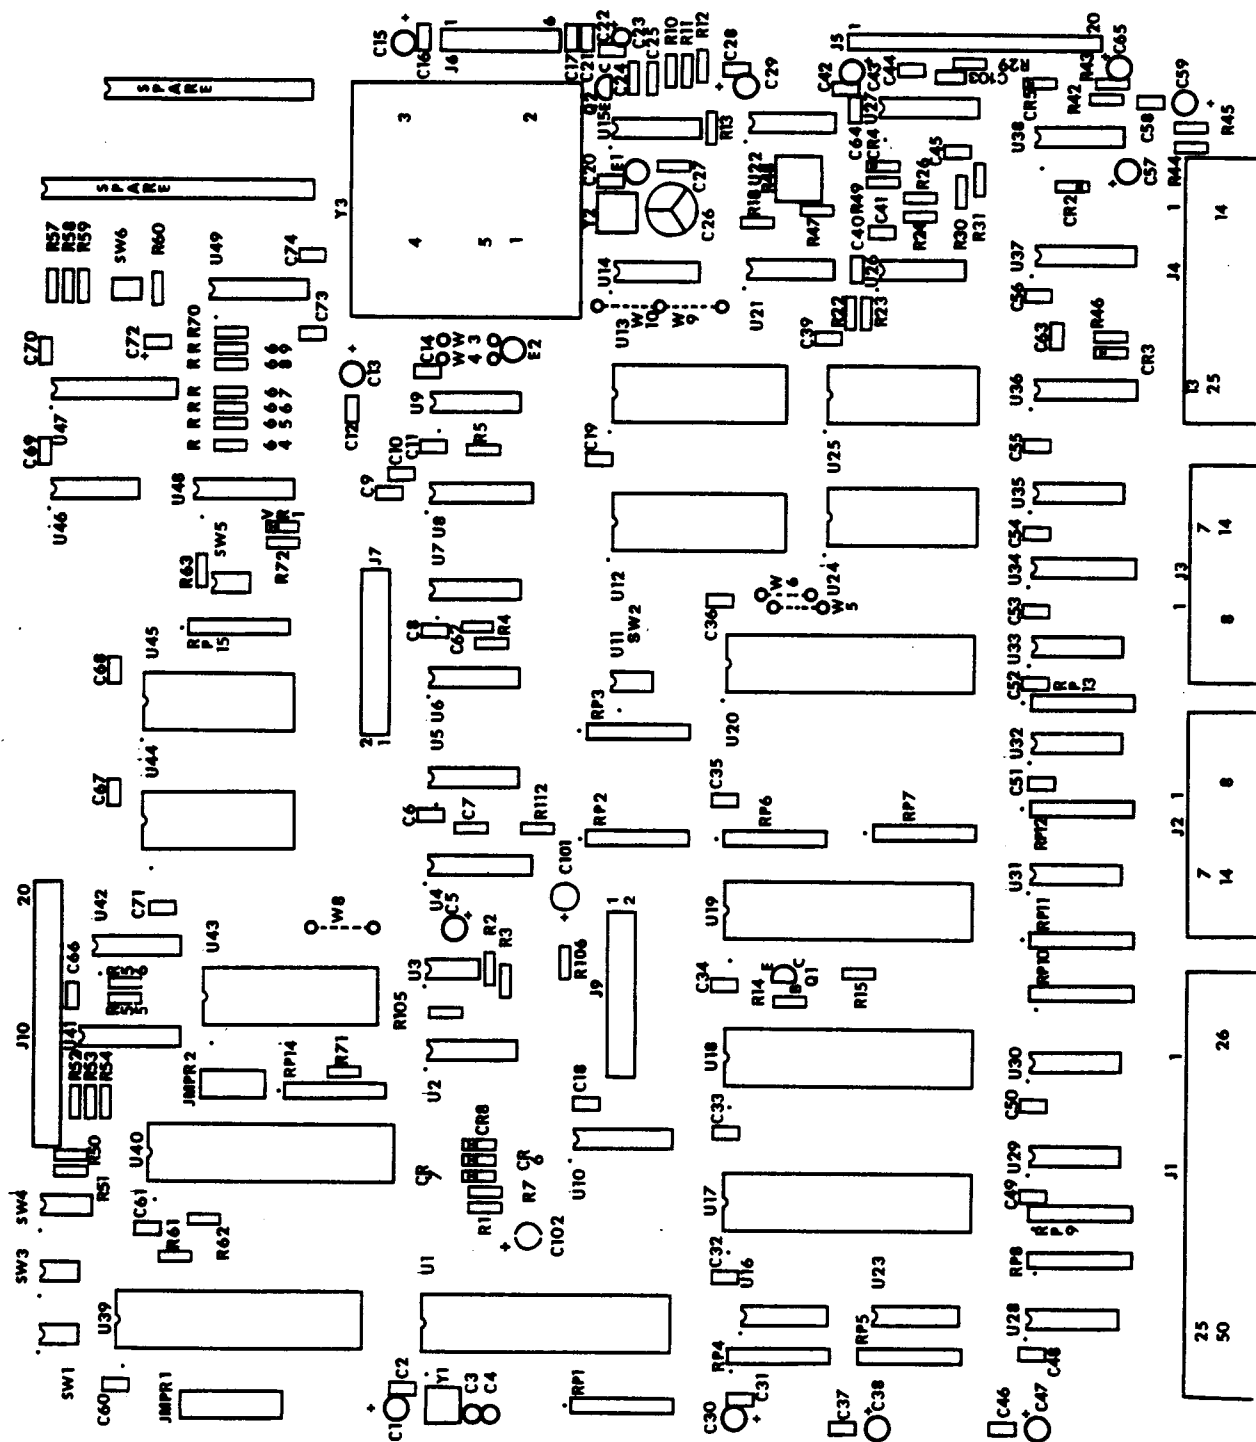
ASSEMBLY DRAWING - MICROPROCESSOR
